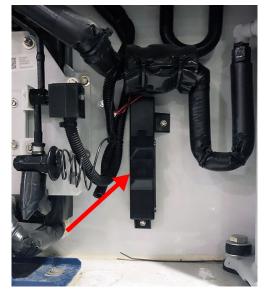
Supply Sensors - Cover Assembly and Sensors
